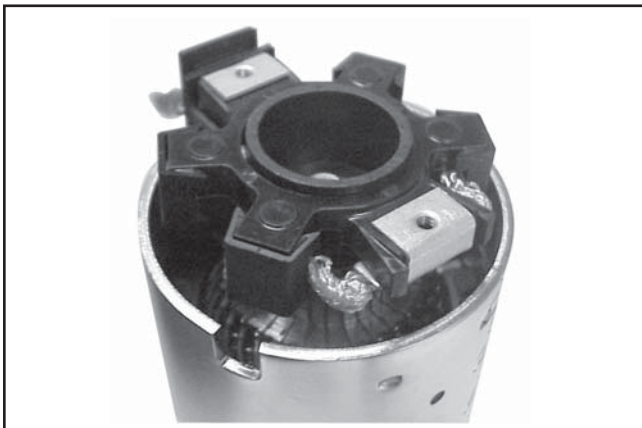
Installing Brush Holder Assembly with Supplied Tube.
